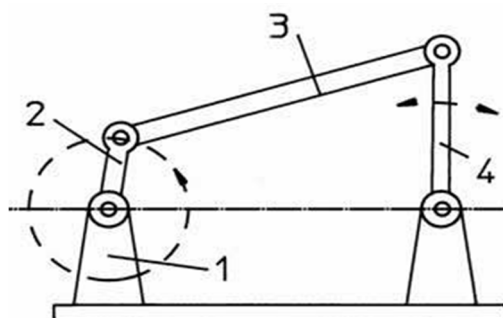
Four-bar Mechanism -1 fixed block (housing), 2 crank, 3 coupler (connecting rod), 4 rocker.
